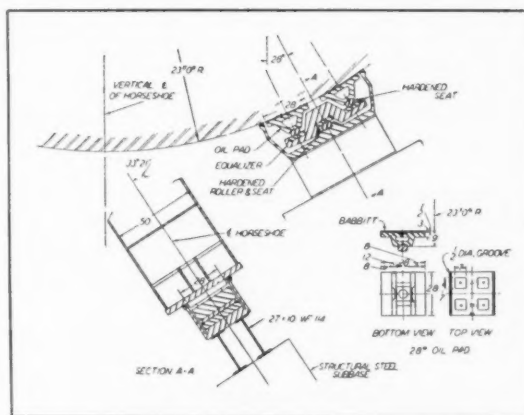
CONSTRUCTION DETAILS OF NORTH POLAR BEARING
